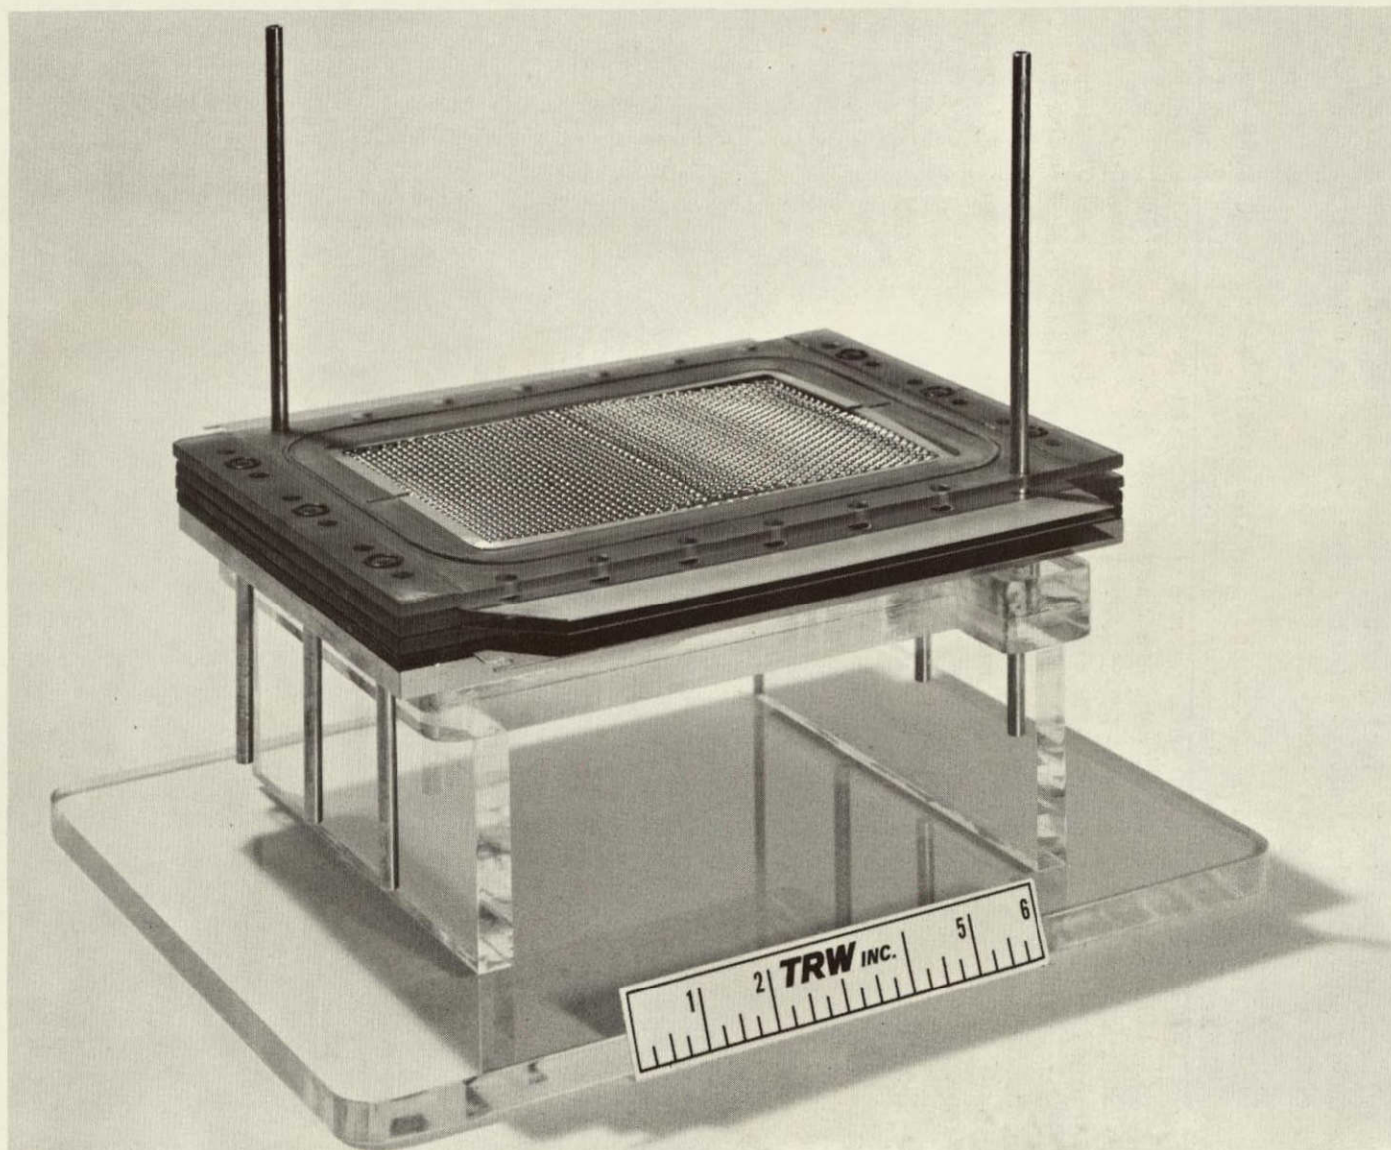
WATER ELECTROLYSIS ASSEMBLY STAND WITH PARTIALLY ASSEMBLED STACK
